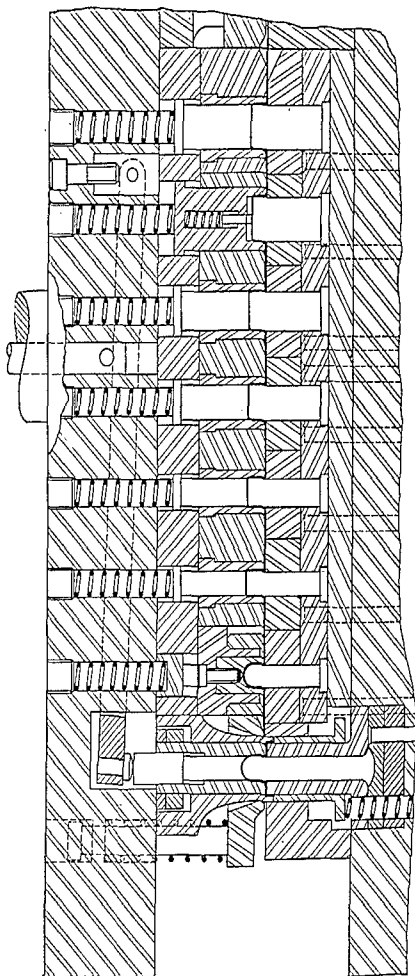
Progressively drawing a cup of 0.005-in.-thick aluminum. (Harris Mfg. Corp.)
